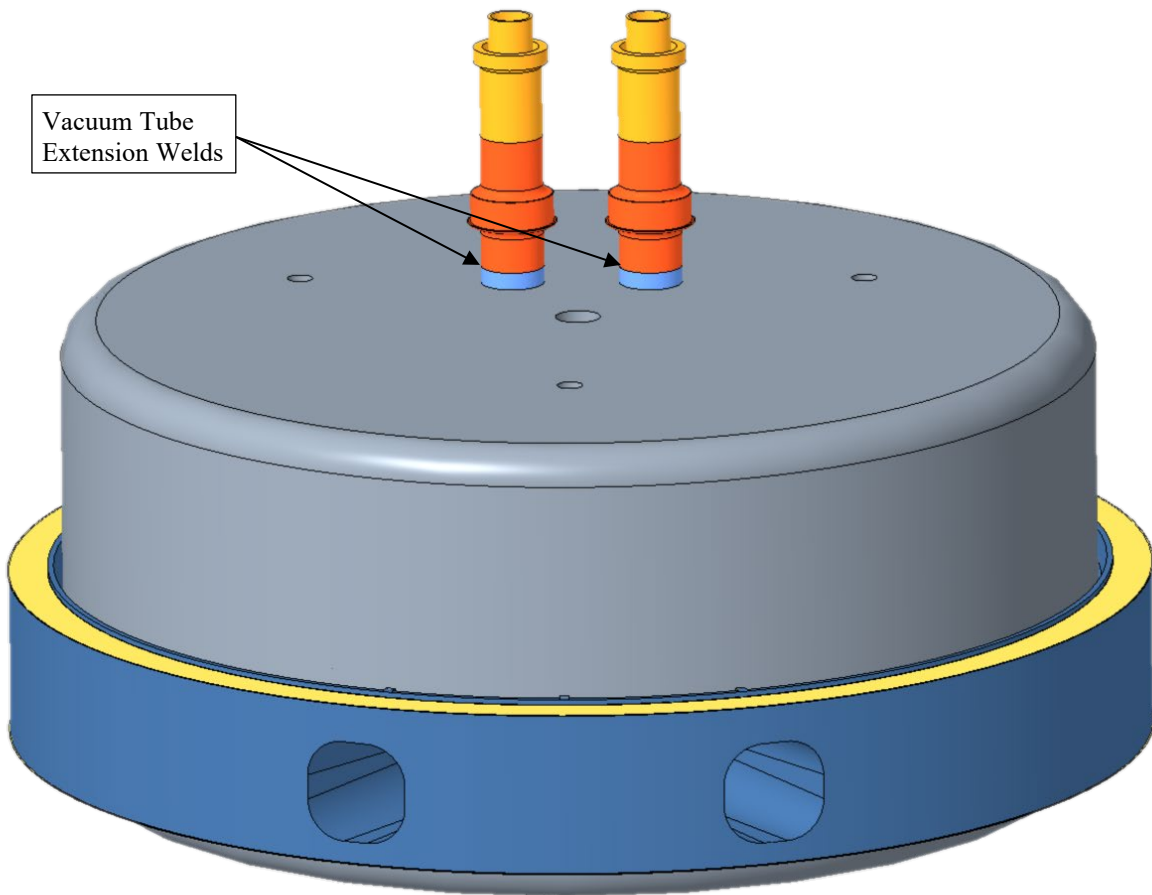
Vacuum tube extension welds after installation of outer beryllium segment.
